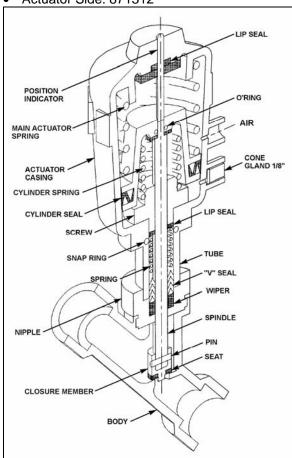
PASSENGER'S UNIT HOT WATER PNEUMATIC VALVE
